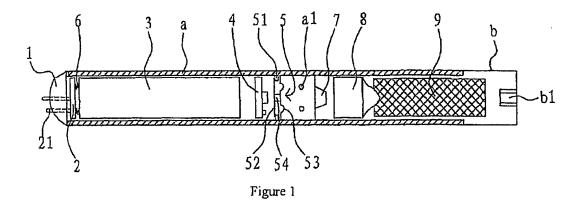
is a side section view of an electronic cigarette. *Id.* at 1:45. Hollow, integrally-formed shell "a" includes a battery assembly, atomizer assembly, and cigarette bottle assembly. *Id.* at 2:30–33. The battery assembly connects to the atomizer assembly in shell "a," and the detachable cigarette body assembly (which fits with the atomizer assembly) is located in one end of shell "a." *Id.* at 2:33–37. Shell "a" also includes through-airinlets a1. *Id.* at 2:37–38. The battery assembly includes operating indicator 1, battery 3, electronic circuit board 4, and airflow sensor 5. *Id.* at 2:39–45. The atomizer assembly is atomizer 8, which includes a porous component and a heating rod. *Id.* at 3:6–8. The cigarette bottle assembly includes hollow cigarette shell holder "b," and perforated component for liquid storage 9. *Id.* at 3:49–51. Air channel b1 is located in the center on the IPR2016-01268 Patent 8,365,742 B2
